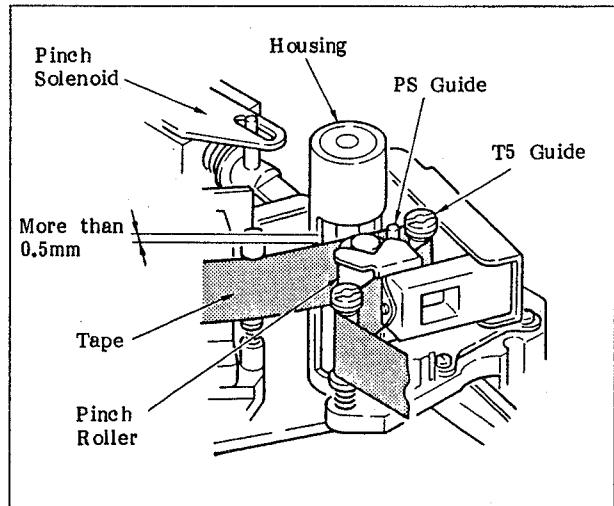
Adjustment of the Position of the PS Guide Assembly (2)
